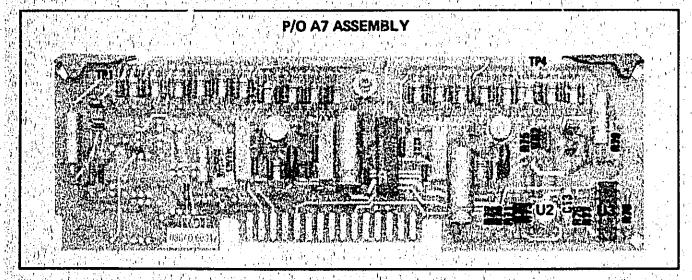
P/O A7 FM Shaping Assembly Component Locations
